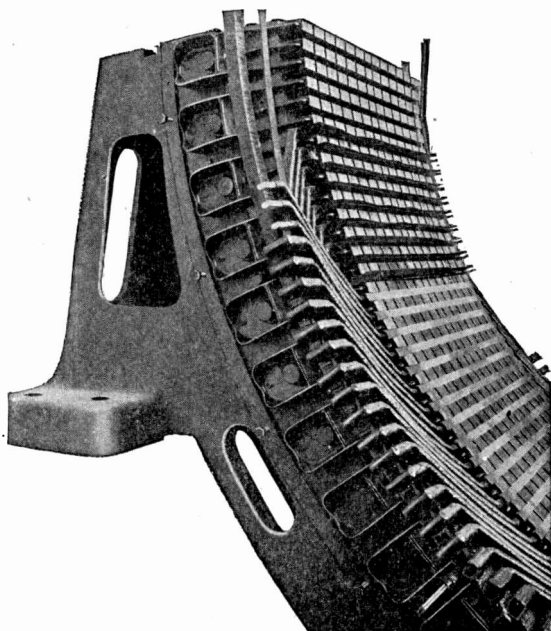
Armature Coil Support Construction—General Electric Alternator
